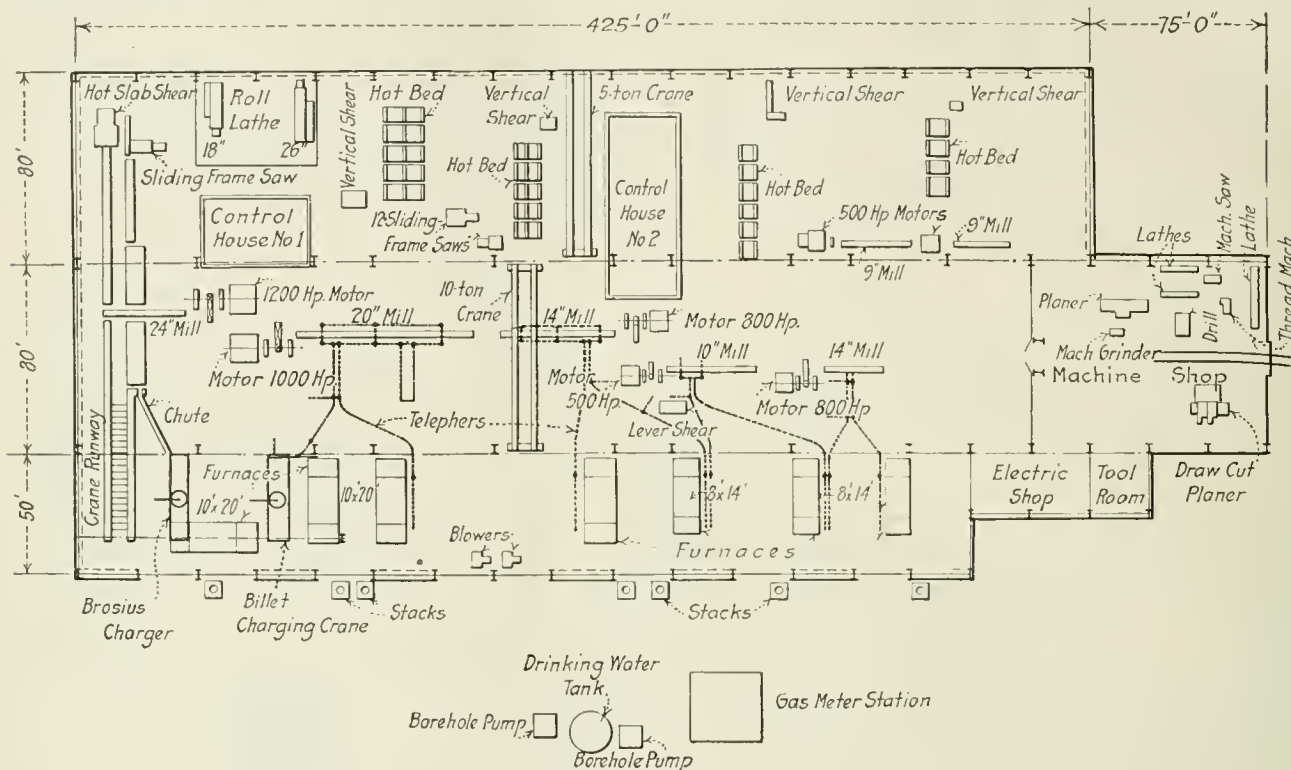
GENERAL PLAN OF MERCHANT MILL
